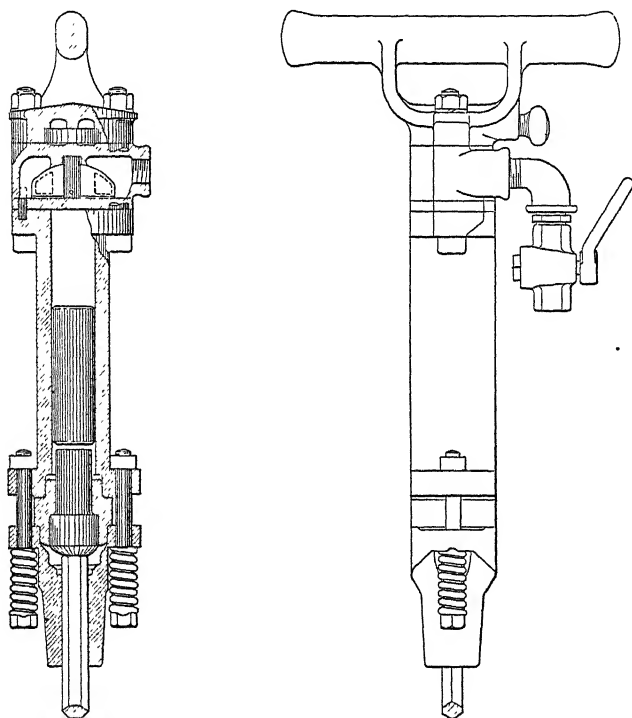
PLUGGER FOR DRILLING HOLES.
